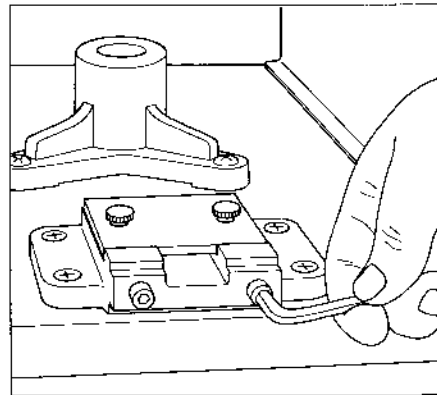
Removing Headrest Mounting Plate Hex Screws
